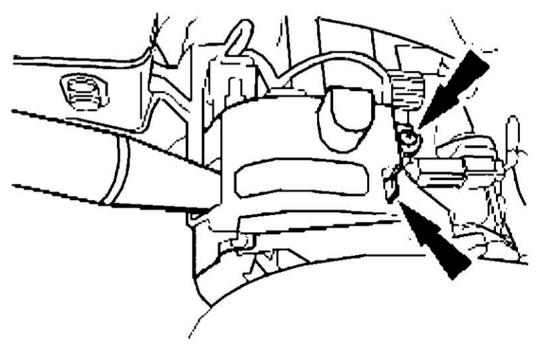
Removing Screw Courtesy of FORD MOTOR CO.
